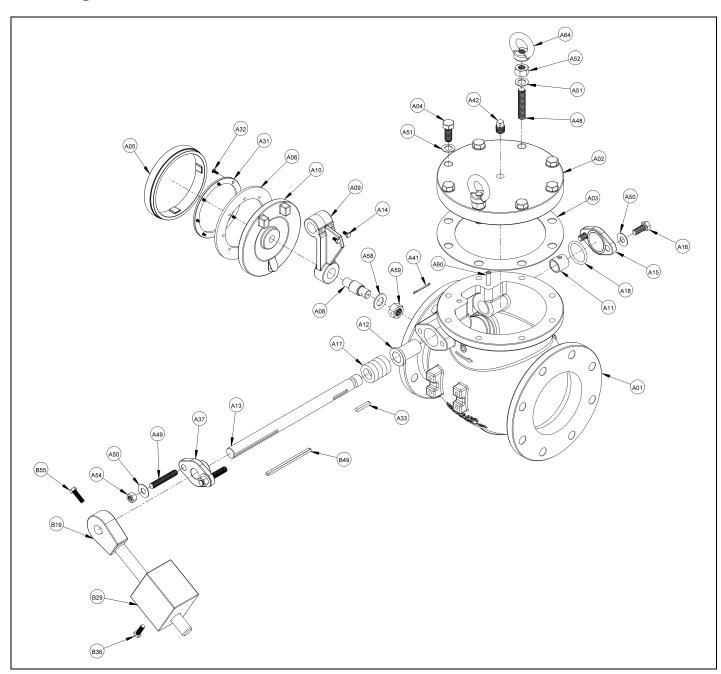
585 Series Swing Check Valve (Weighted Lever)
